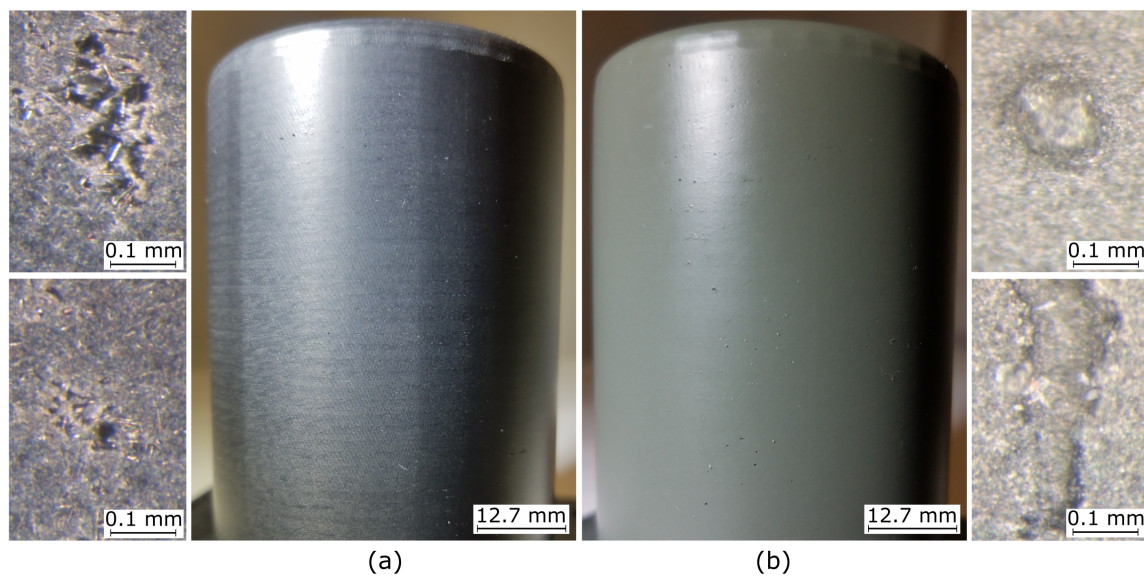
The (a) non-coated and (b) coated demolding test tool surface before 1st part production cycle.
